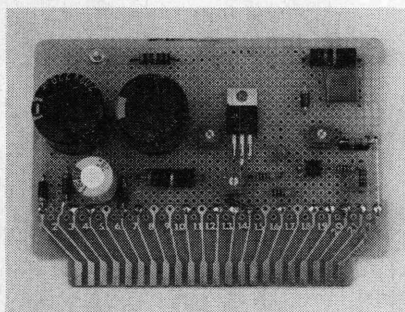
MOST OF THE CIRCUITRY is contained on a 44-pin edge-constructor-perforated construction board.
